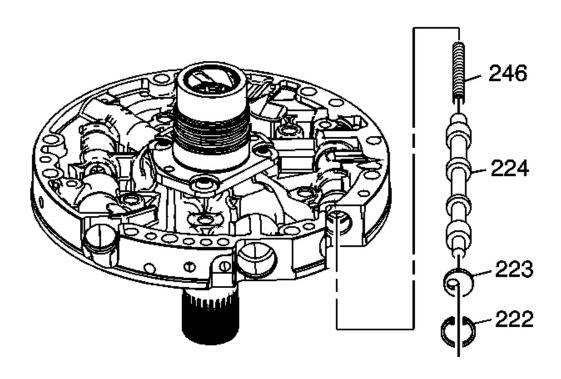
Identifying Pressure Relief Bolt Valve Components Courtesy of GENERAL MOTORS CORP.
